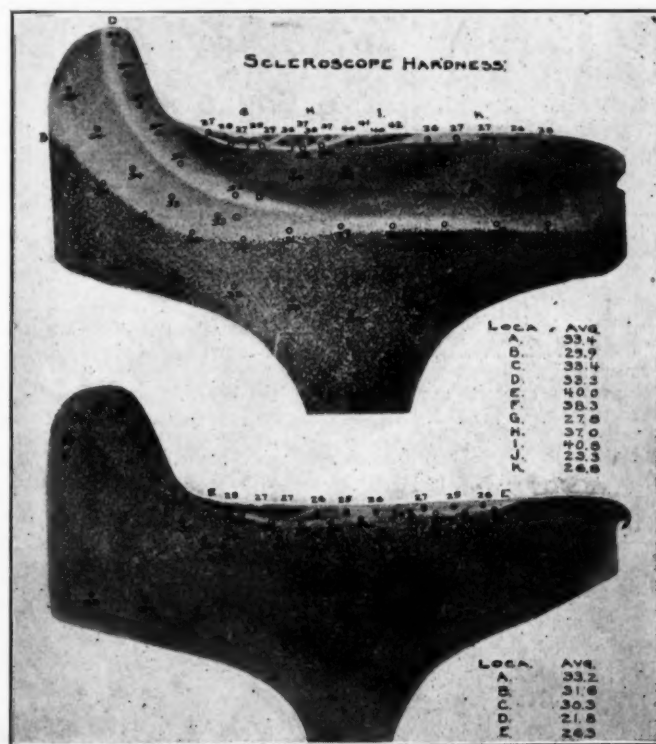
Transverse Section Through the Rim of a Rolled Steel Wheel With Flat Spots Welded By the Gas Method Top, Before Annealing; Bottom, After Annealing.
